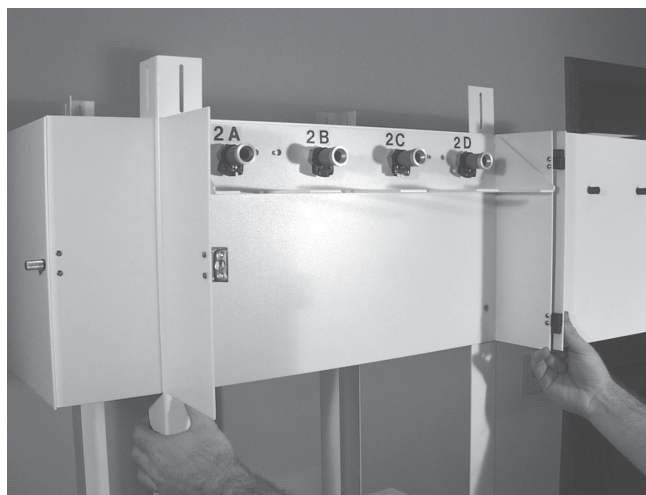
Be sure to hold the screw with a screwdriver while turning the nut.
